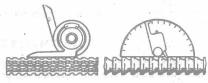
Face angle of a new broach should be measured before use and checked after sharpening. A combination hook and radius gage, right, determines face angle and proper curvature of chip space.
